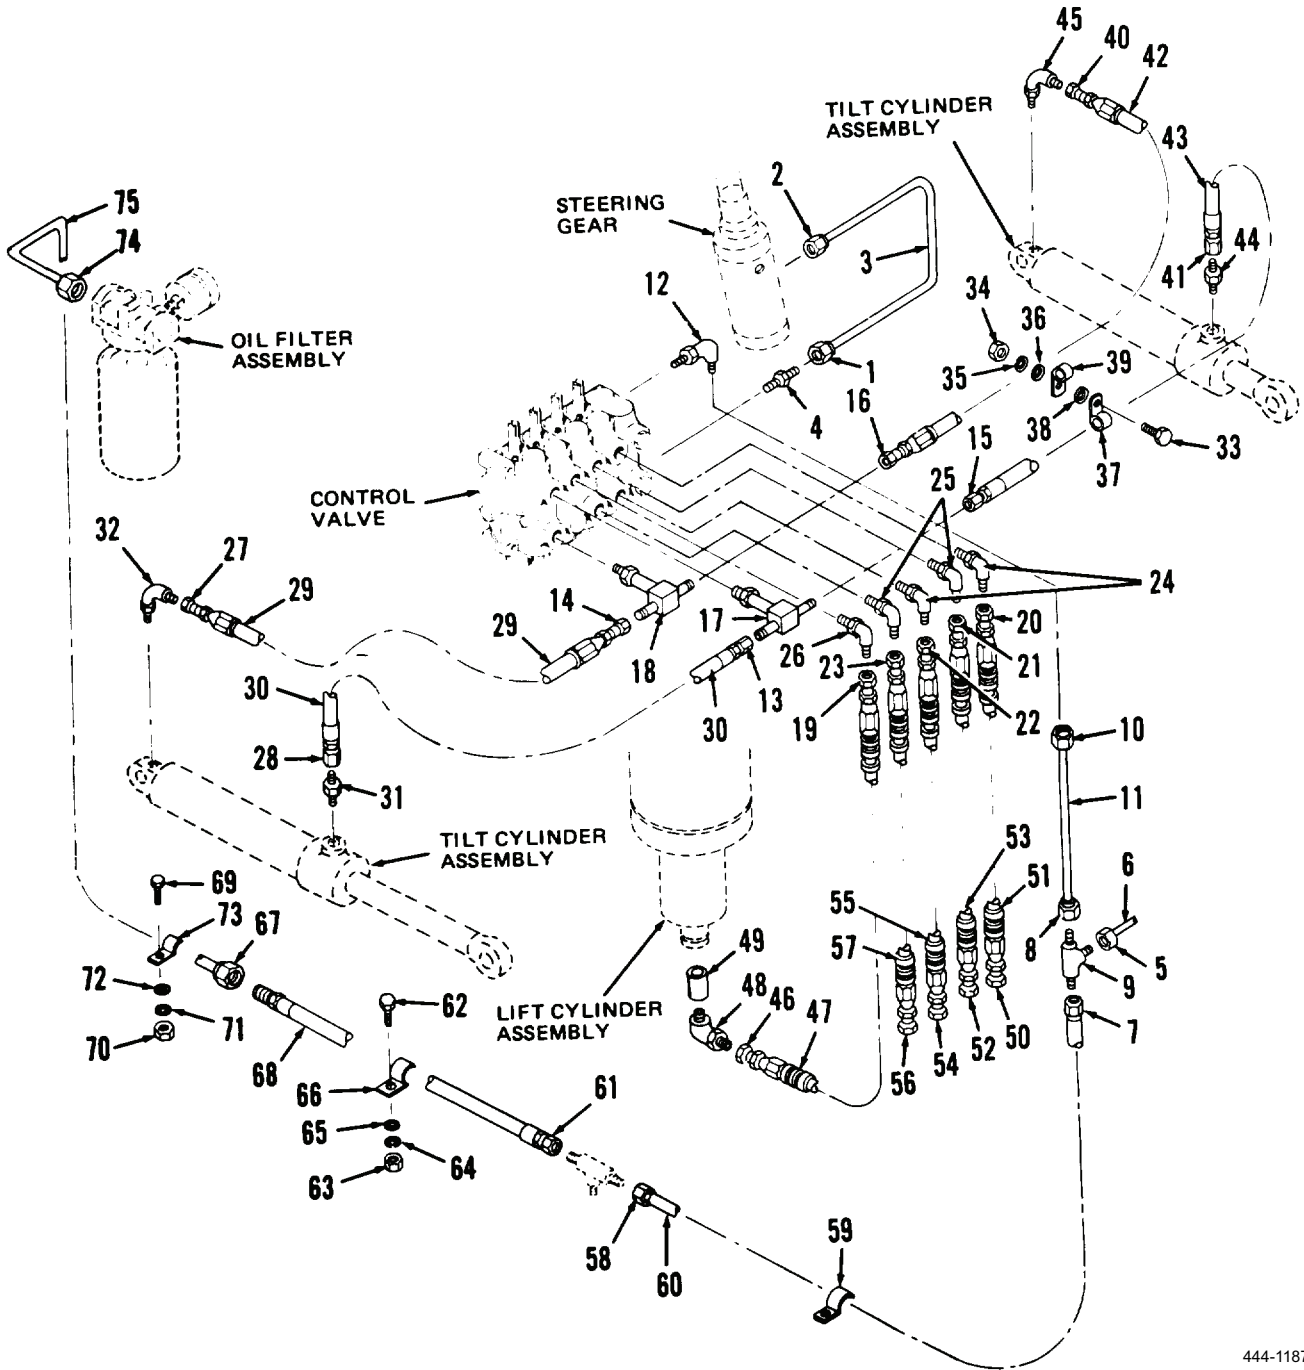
Hydraulic Hoses, Lines, and Fittings.
